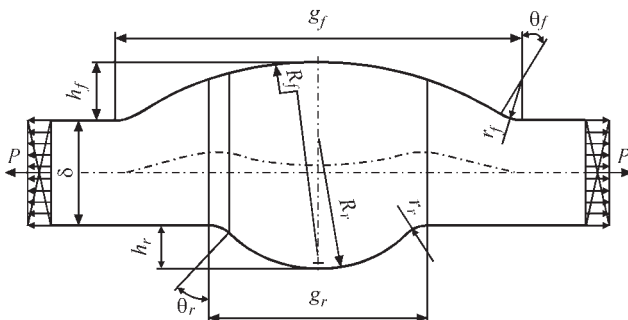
Geometric parameters of an idealised model of a butt joint made by one-sided fusion welding
